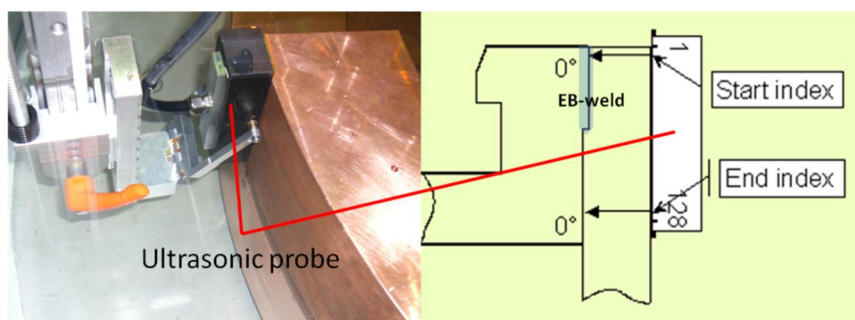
Linear phased array ultrasonic testing of EB weld.
